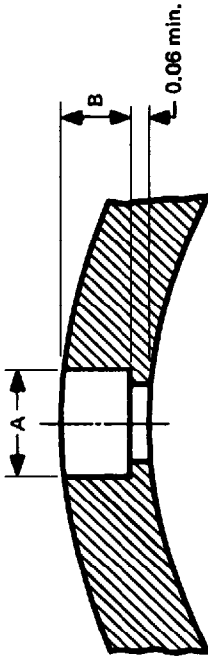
SOCKET WELDING FOR CONNECTIONS¹
